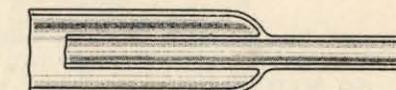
TUBE WITH INTERNAL SEAL
